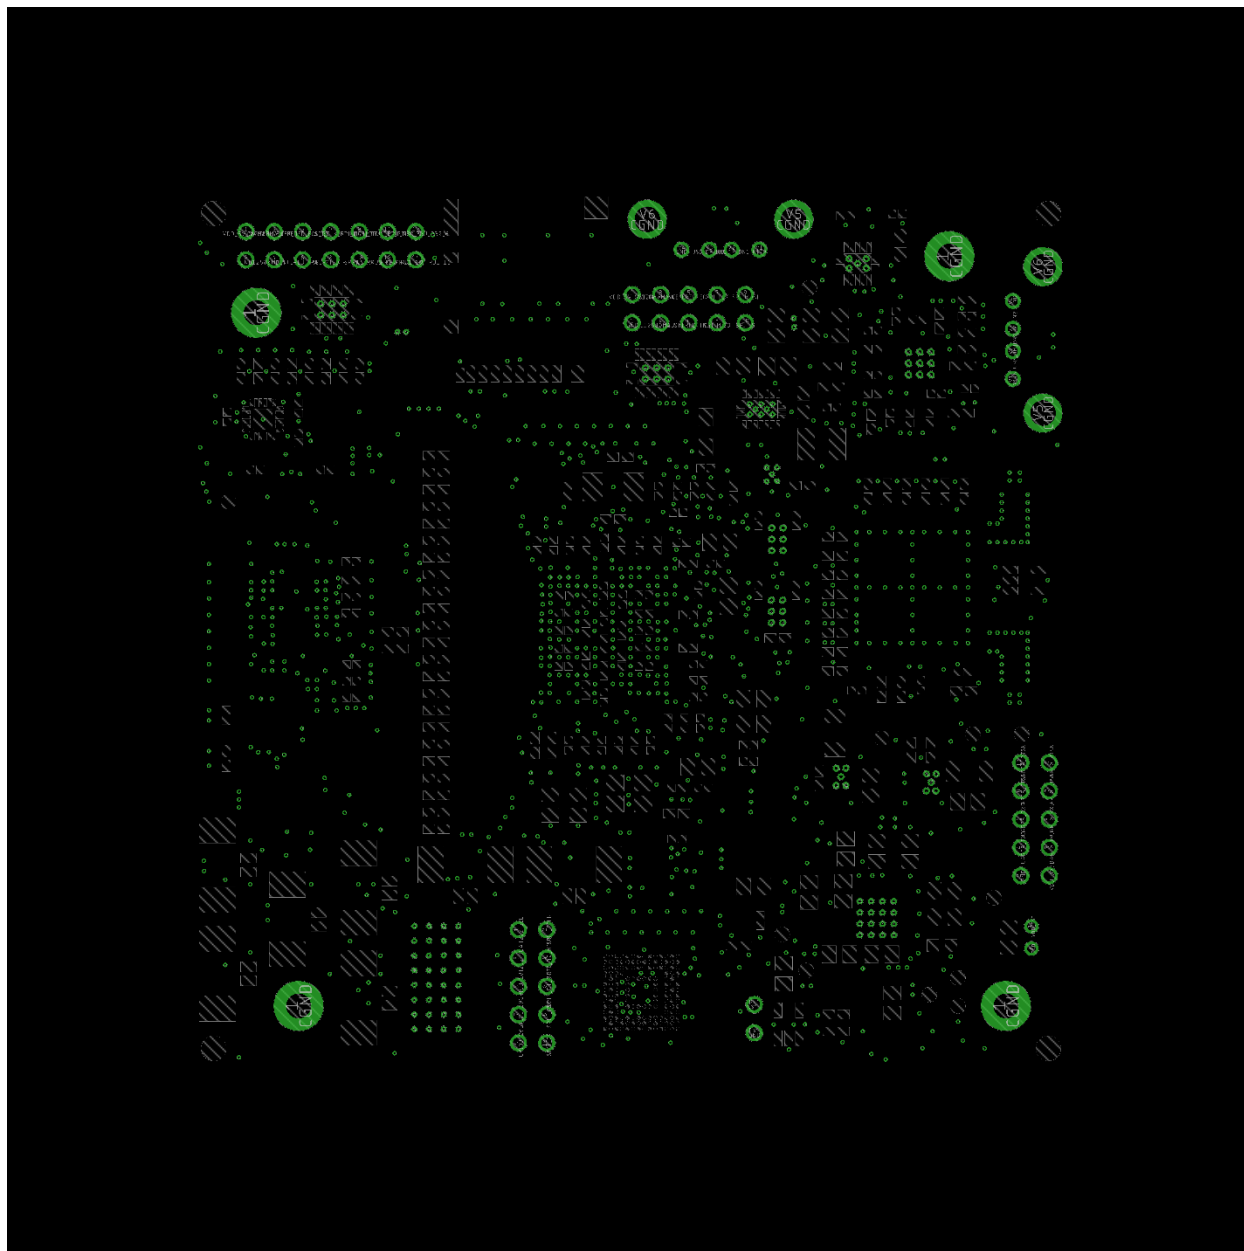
Bottom layer solder mask of the main electronic board including all vias and pads.
